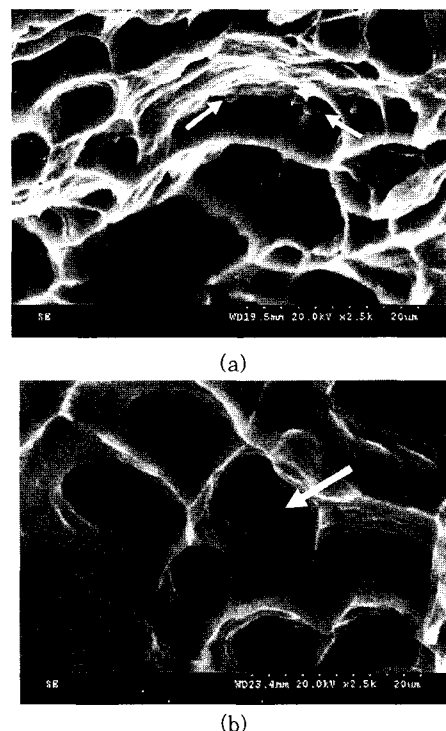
SEM fractographs of tensile test specimen in welds (a) as-welded and (b) 450°C for 2hr
